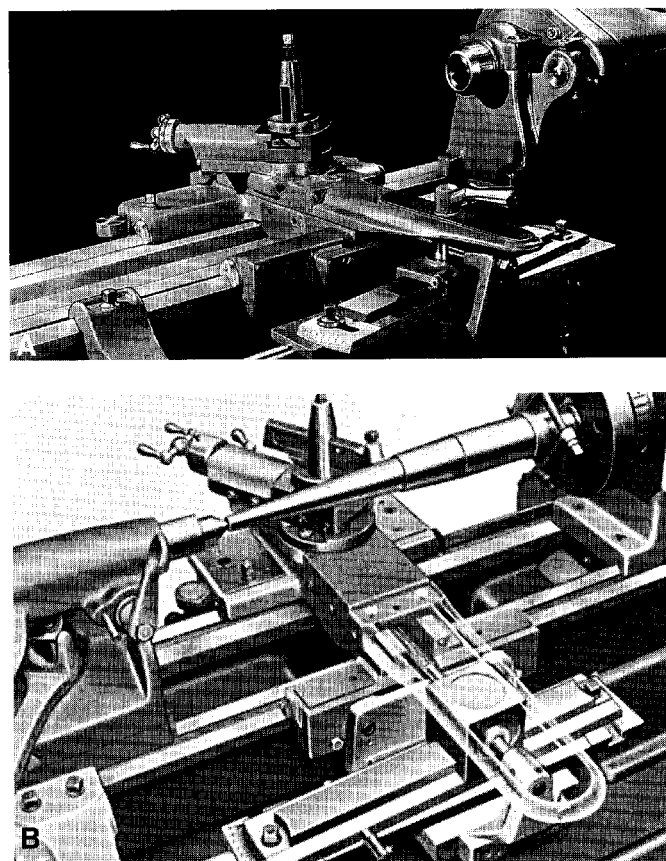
Taper attachments. A—Plain taper attachment. (South Bend Lathe Corp.) B—Telescopic taper attachment. (Clausing Industrial, Inc.)
